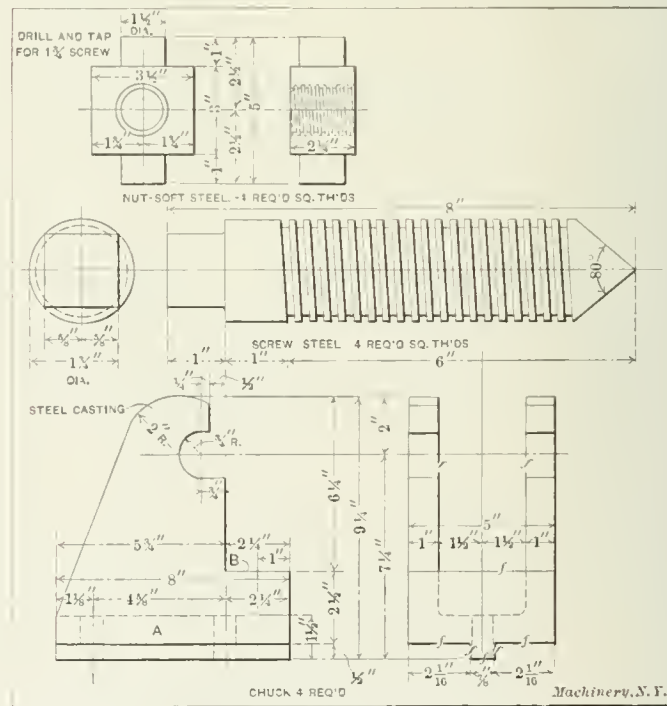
Details of Chuck used on Boring-mill for Boring Casting shown in Fig. 1
